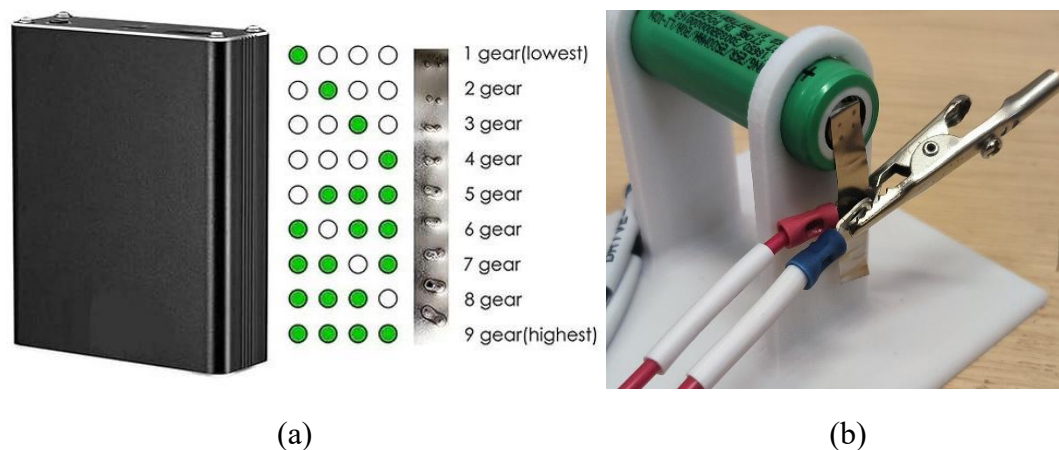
(a) Spot welding device gears and (b) connection of the battery cycler wires.
